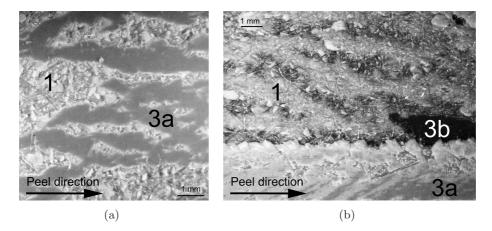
Close up of the fracture surfaces at the rigid adherend of EA9695 specimens when peeling off (a) the aluminium from the aluminium (A-a) and (b) the aluminium from the composite (C-a): 1 – cohesive failure, 3a – adhesive failure at the aluminium interface, 3b – adhesive failure at the composite interface.
